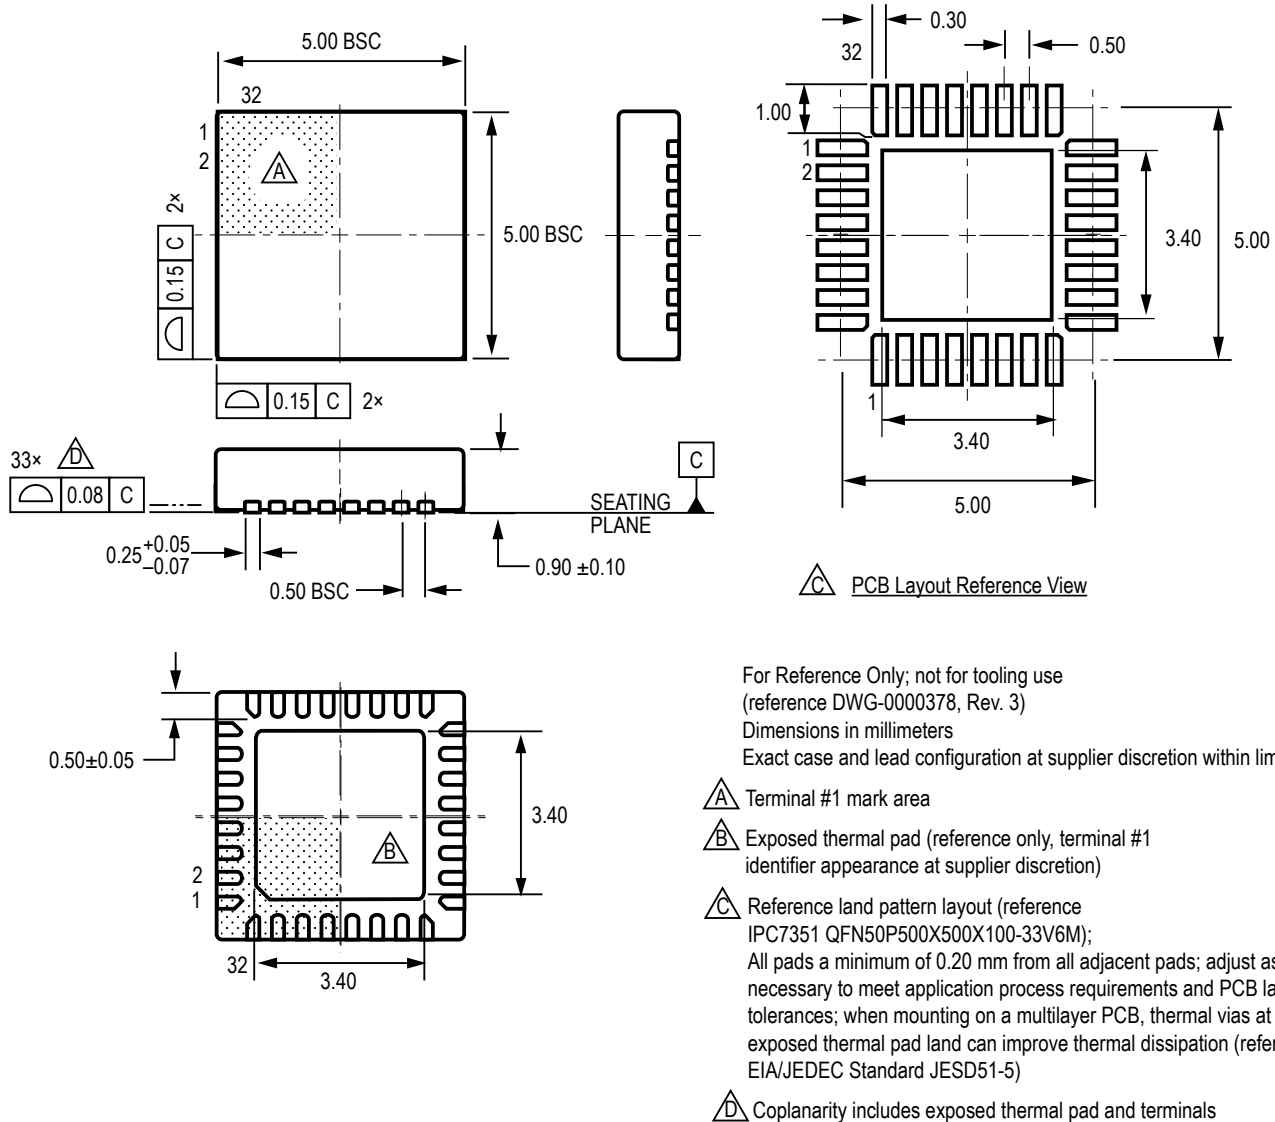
ET Package, 32-Pin QFN with Exposed Thermal Pad
